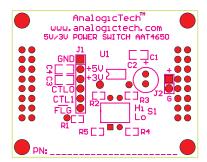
Evaluation board top side silk screen layout / assembly drawing
